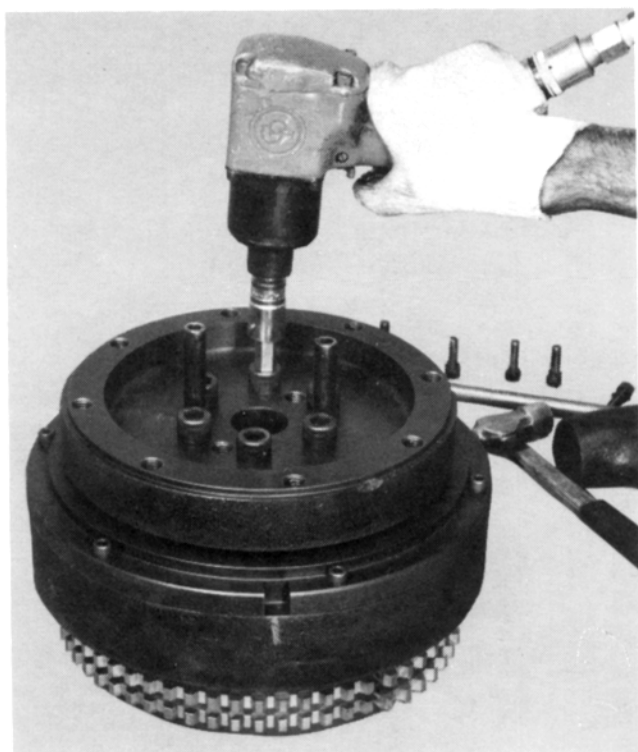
Assembling Cylinder And Thrust Plate To Driven Hub
